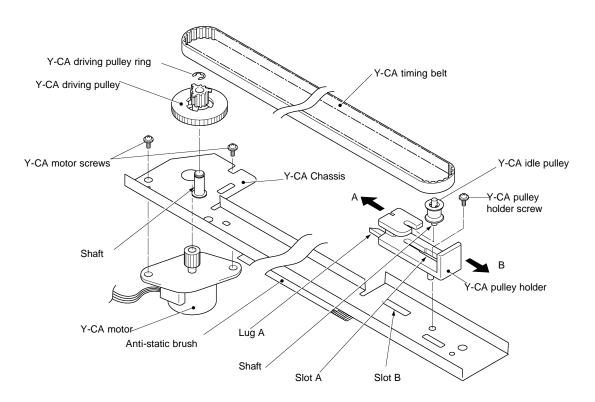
Reassembling the Y-CA Chassis Assy
